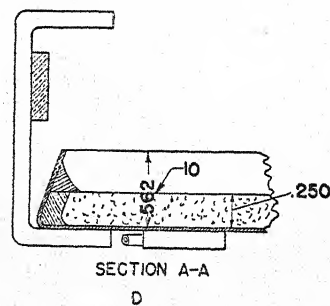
DRAWING OF PARTS FOR MOUNTING POROUS PLATES IN A PRESSURE COOKER
